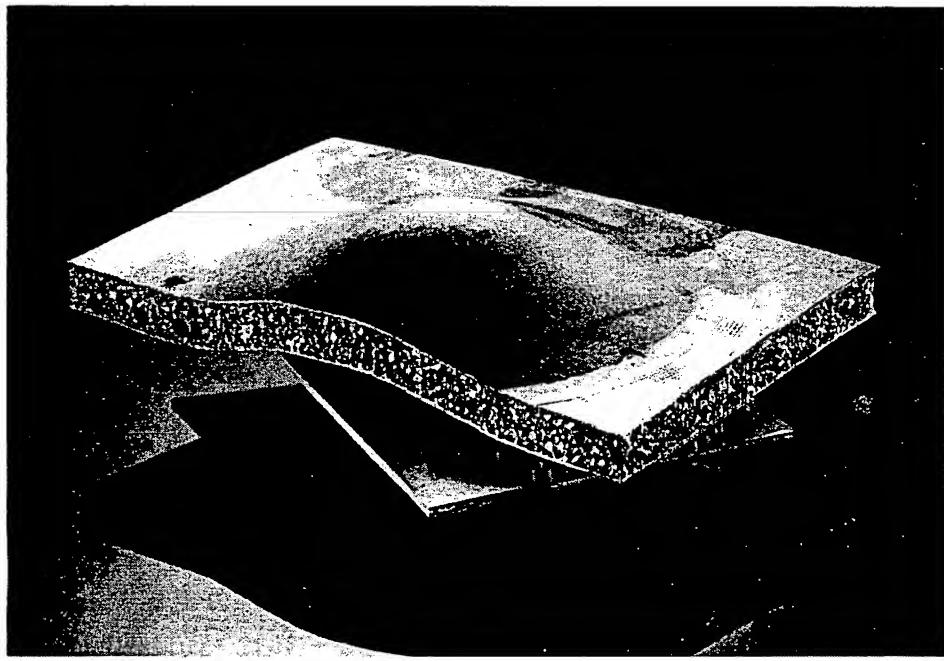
Sandwich panel having an aluminium foam core (thickness 12 mm) and two steel face sheets (source: Fraunhofer and Studiengesellschaft Stahlanwendungen).
